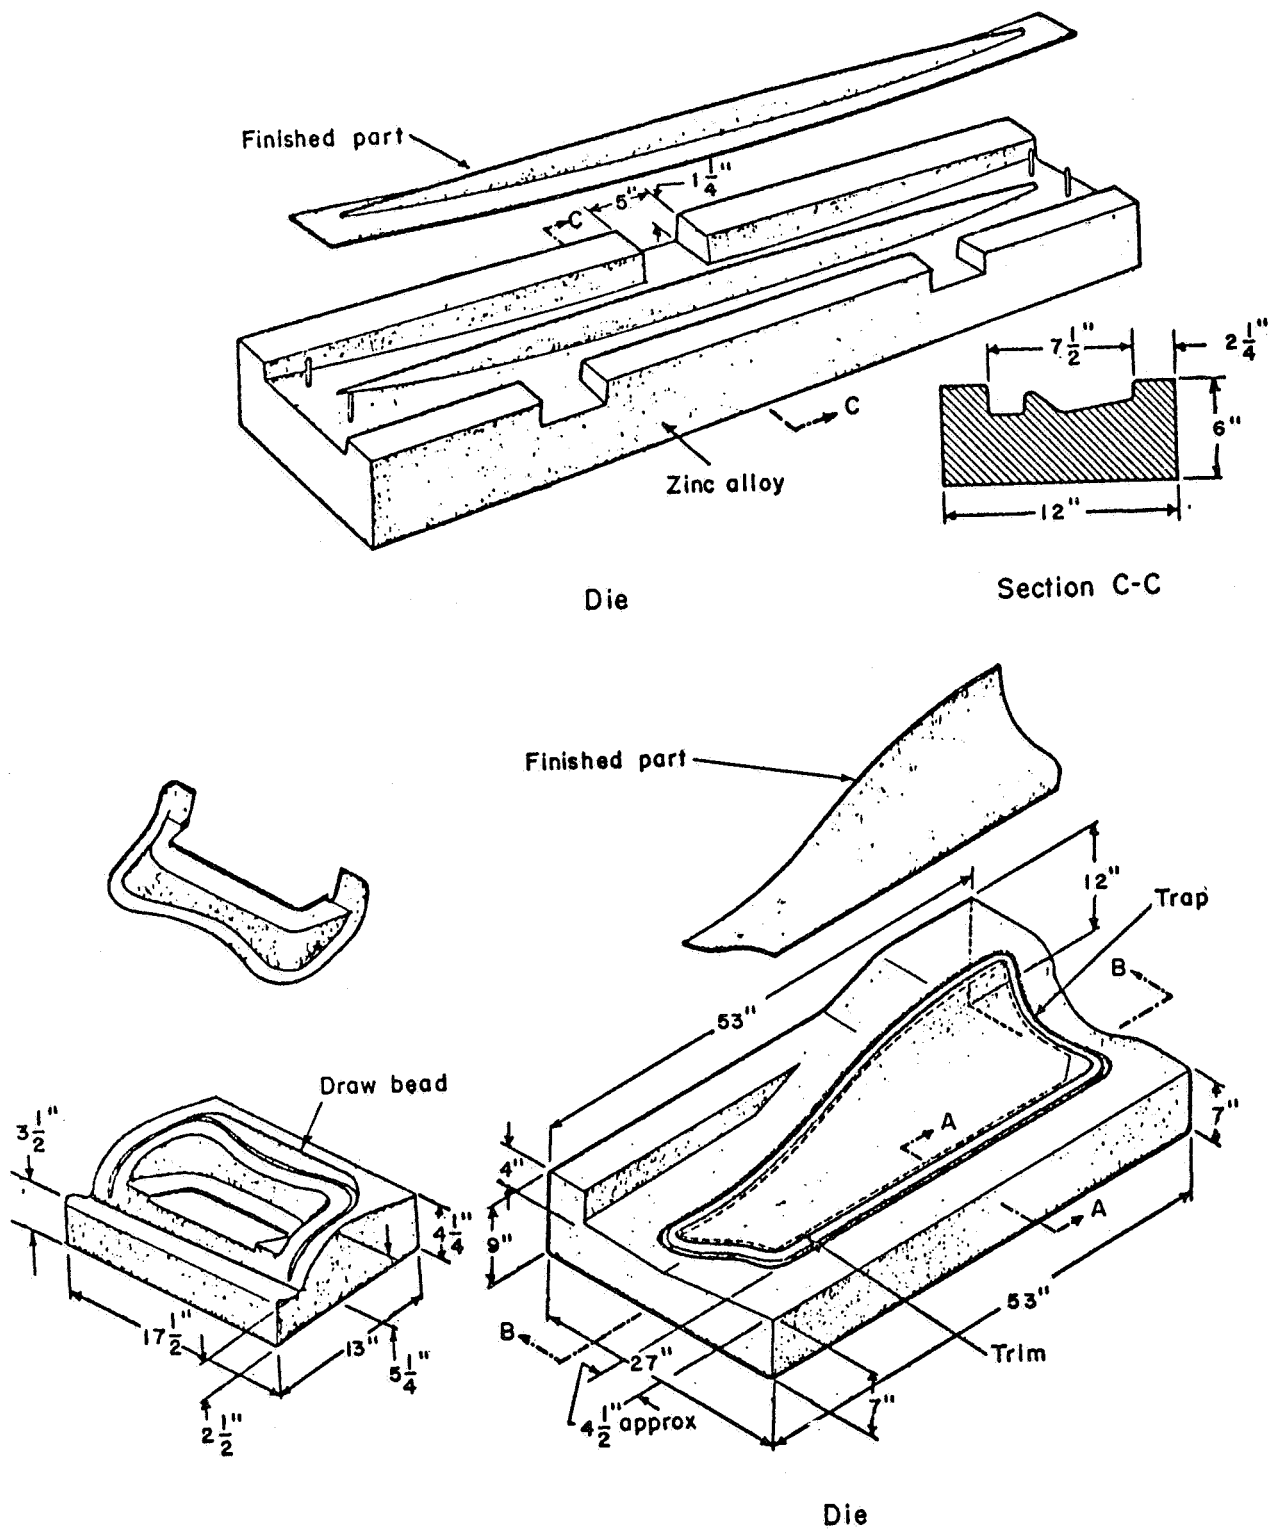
TYPICAL DROP-HAMMER DIES AND FORMED PARTS (REF. 55)
